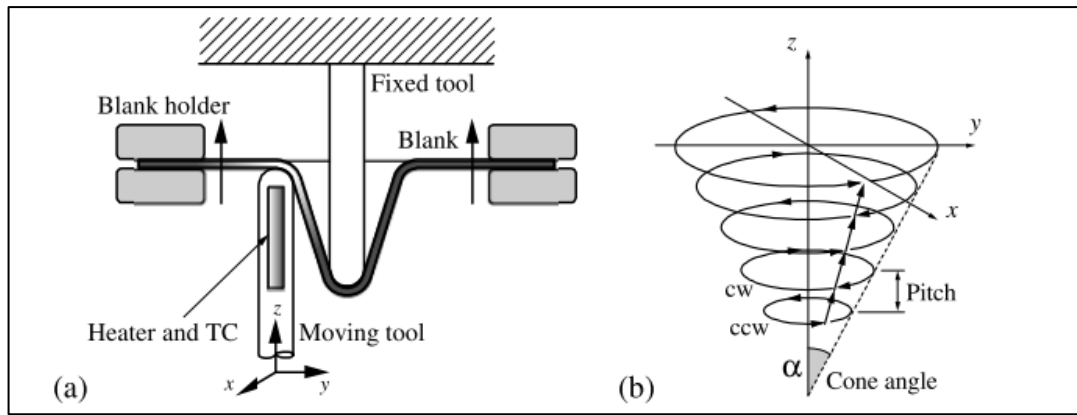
Schematic Illustrations of (a) Incremental Sheet Forming with Local Heating Using Moving Tool and Fixed Tool, and (b) Tool Path for Cone-Shape Forming Experiment
